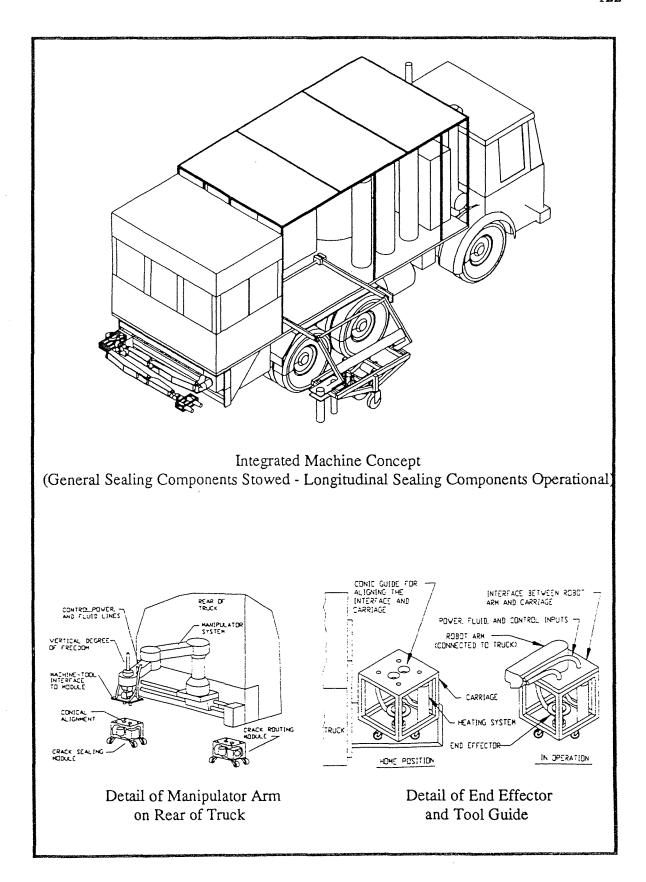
Truck-Mounted Manipulator Arm Design
